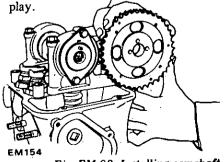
Installing camshaft sprocket 5. Install rocker arms by pressing valve springs down with a screwdriver.
